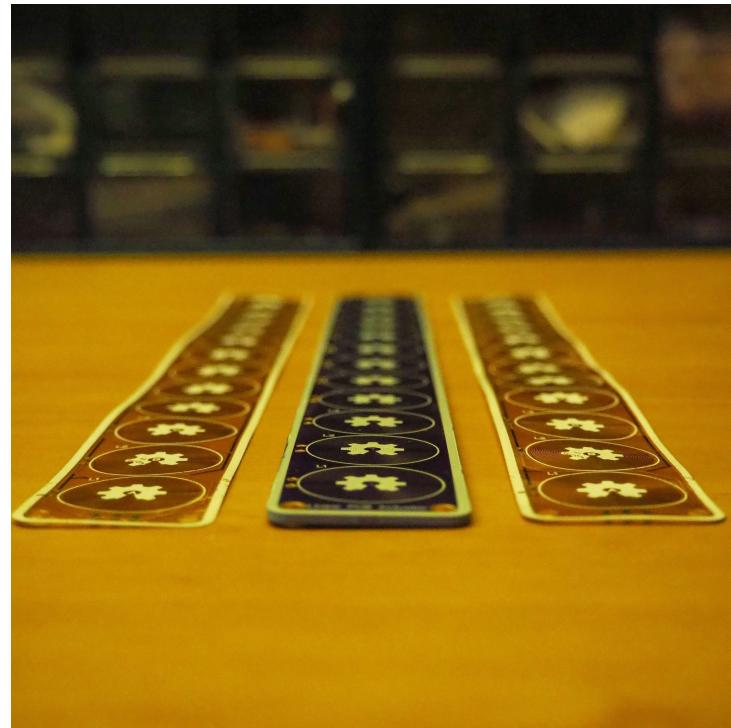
PCB design of spiraling coils that form a linear path for a magnet Source: hackaday.io ref: URL07
